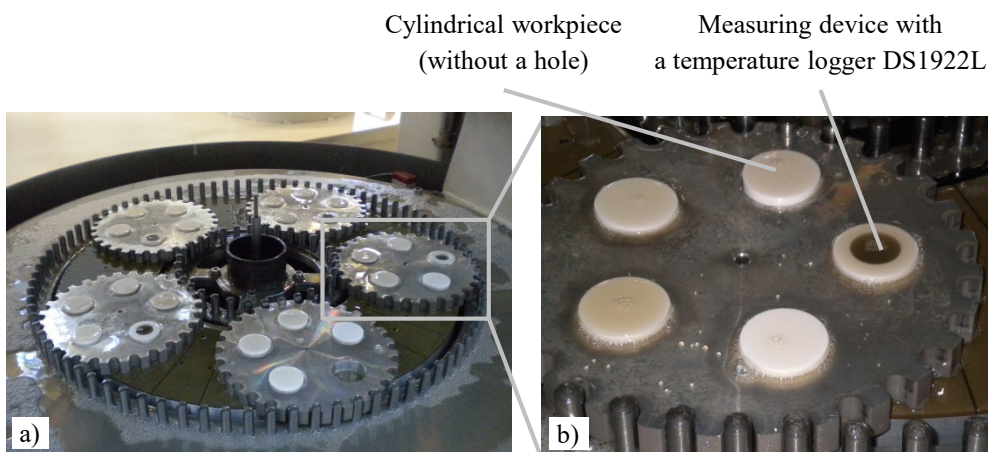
Arrangement of ceramic workpieces in a machining system for double face grinding with planetary kinematics: a) general view, b) single workpiece holder with a measuring device and four cylindrical workpieces
